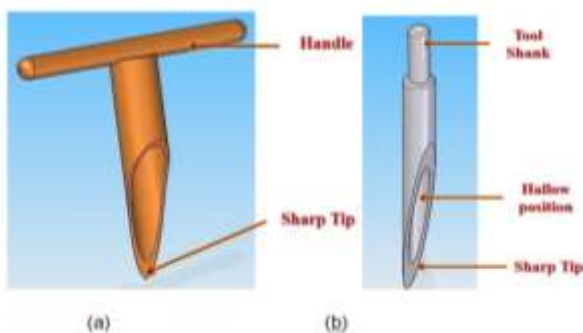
(a) Tender Coconut cap opener (b) Piercing tool
